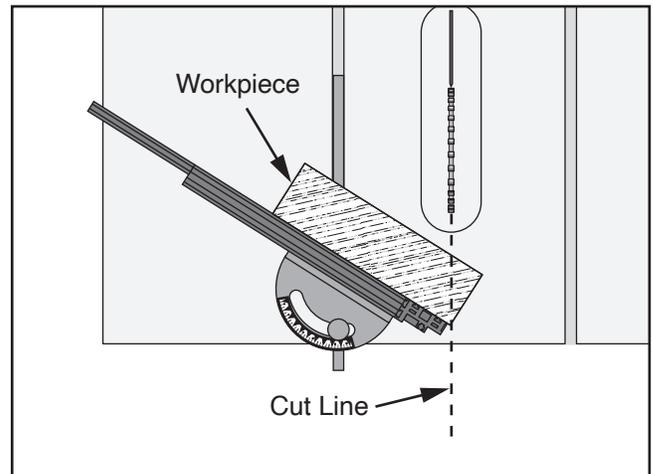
Workpiece prepared for cut (blade guard removed for clarity).
